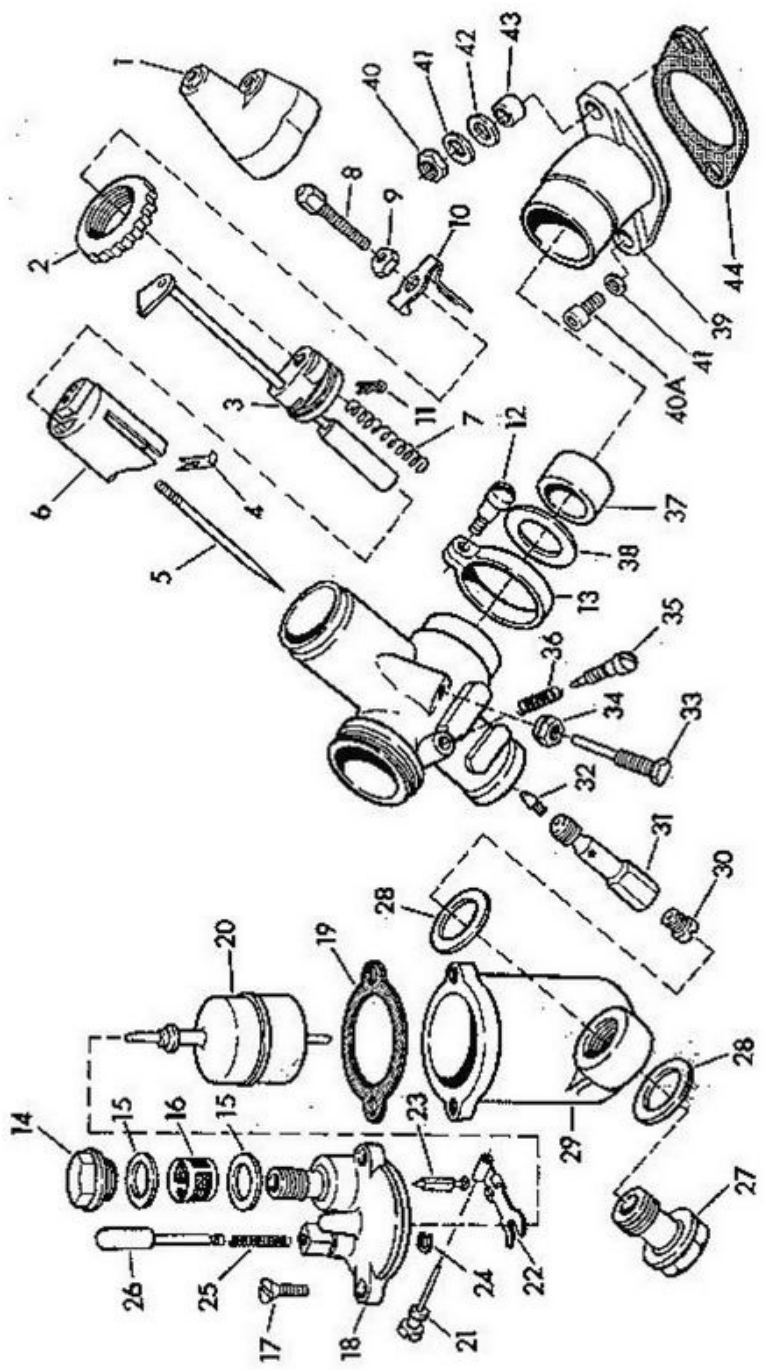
F-30. Carburetor, 1968 & Earlier Models - Exploded View
